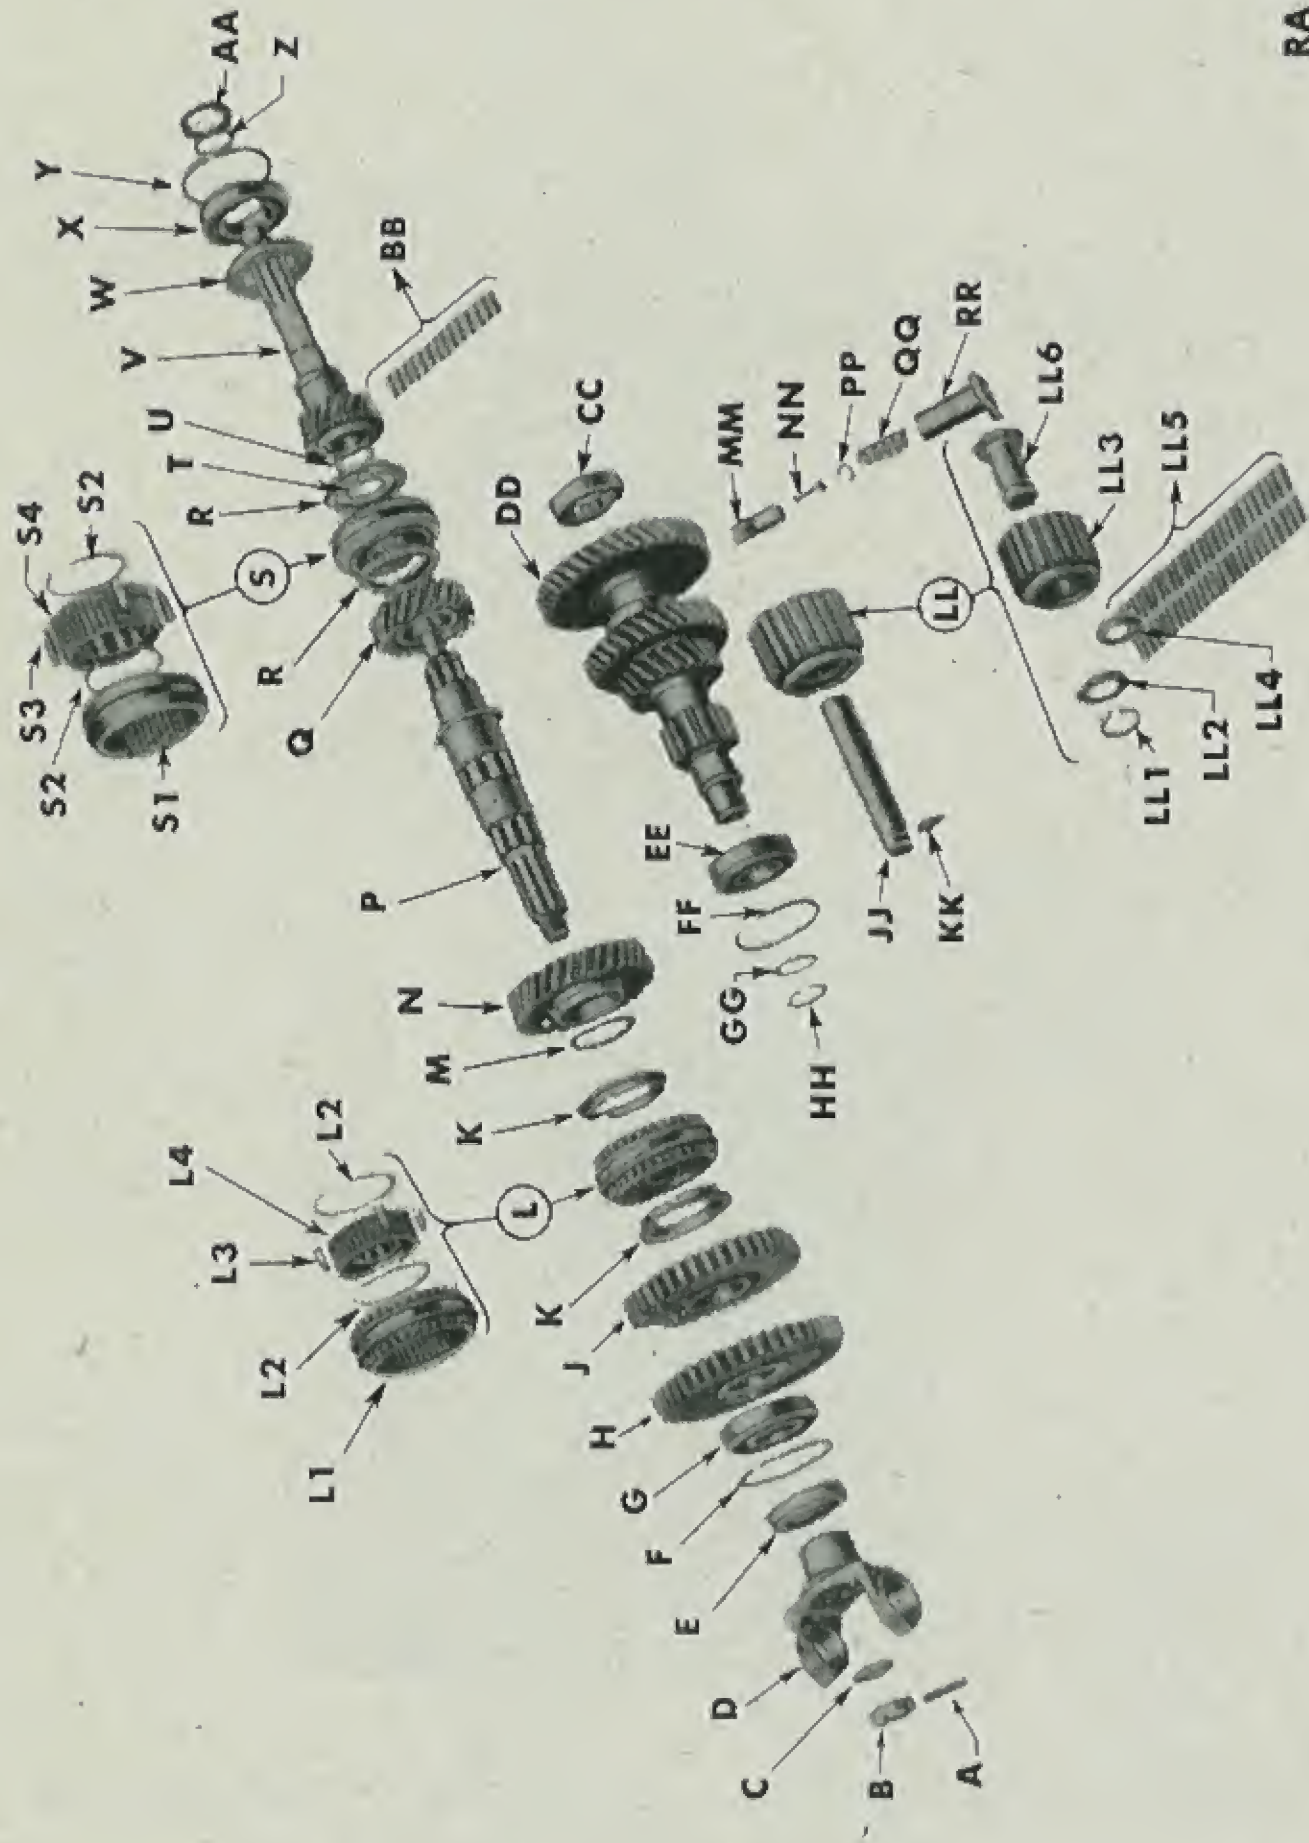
Transmission Assembly, Gears, Bearings and Shafts, Disassembled
